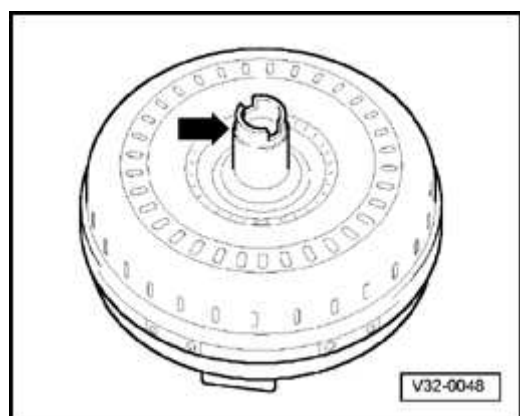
Inspect Torque Converter Hub For Irregular Grooves
